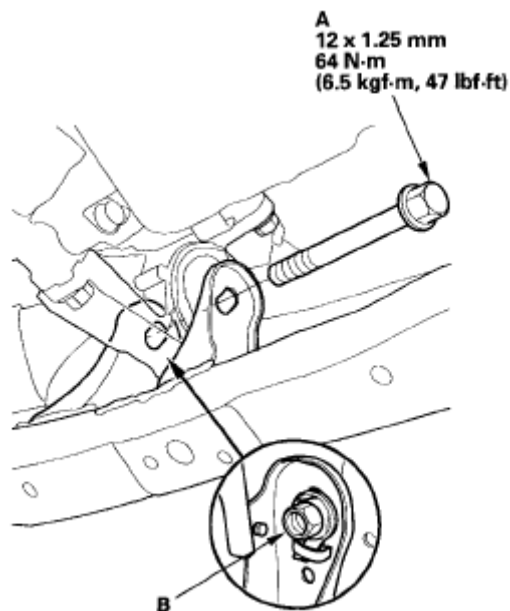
Identifying Lower Engine Mounting Bolt (With Torque
